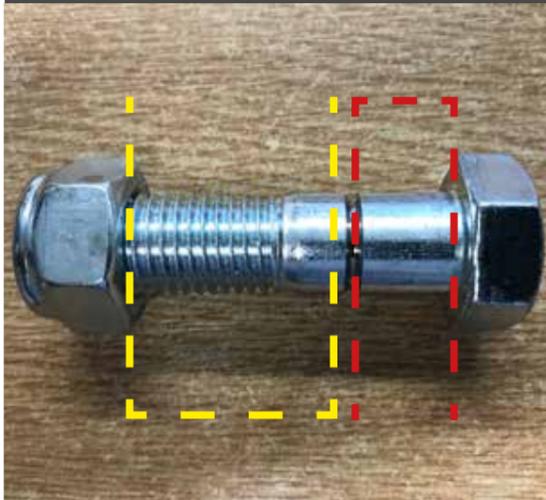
SHEAR BOLT WITH SHEAR PLANE
